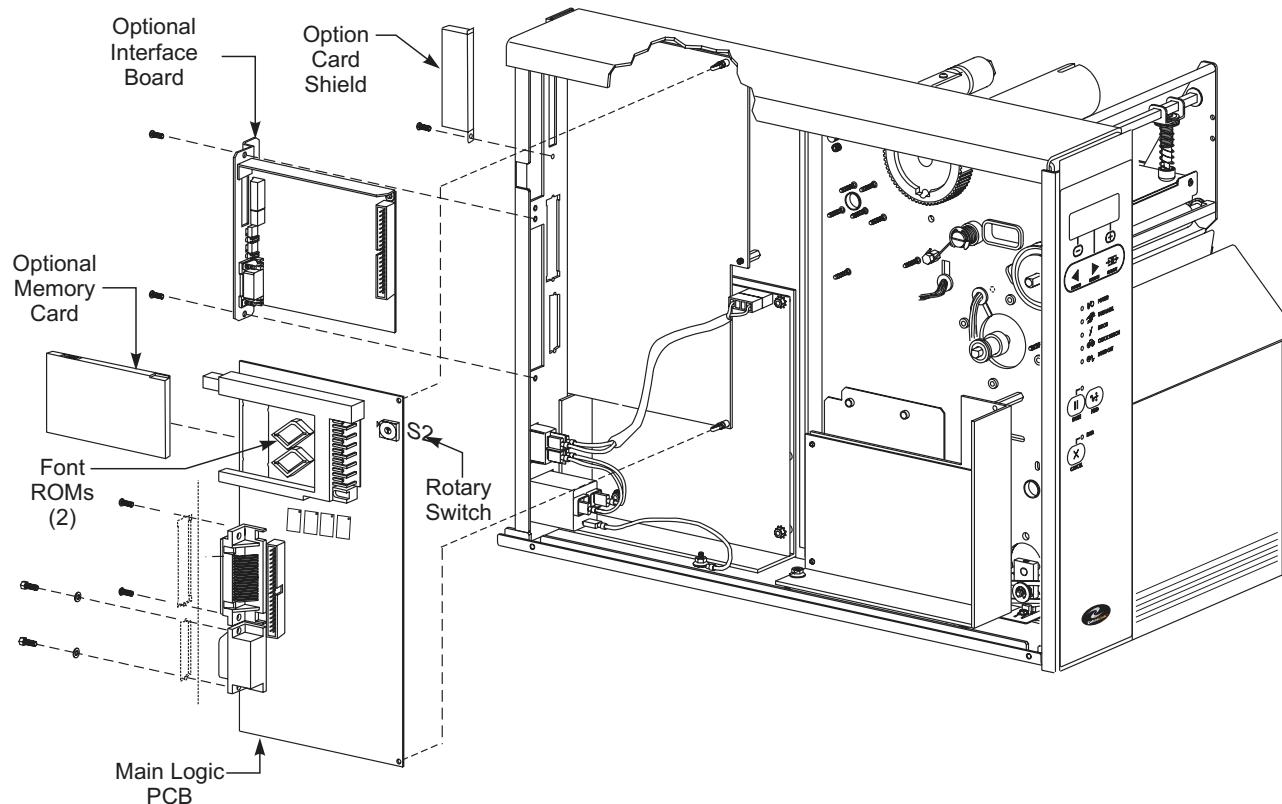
Main Logic Board Removal and Installation (Printer Configurations 10500-0XXX-XXXX and 10500-1XXX-XXXX)
